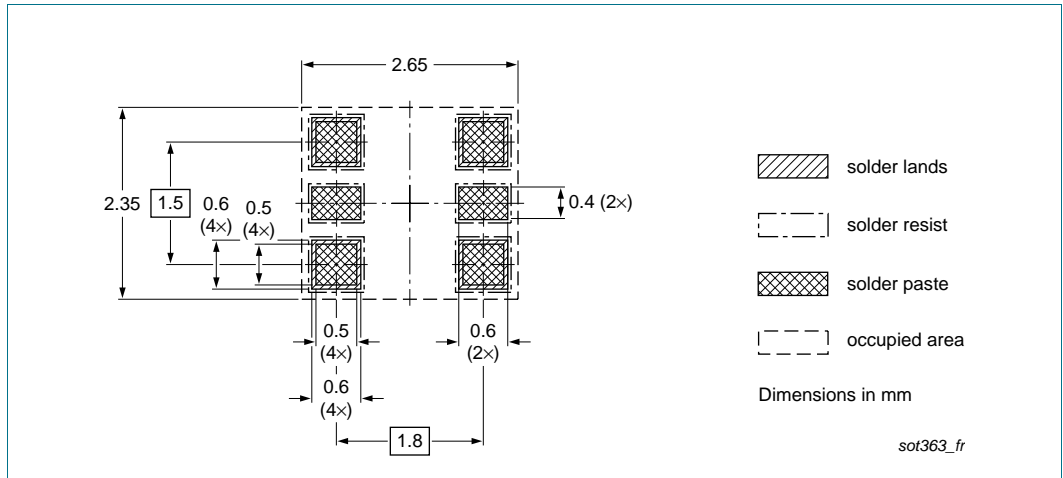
Reflow soldering footprint BAV756S and BAW56S (SOT363/SC-88)
